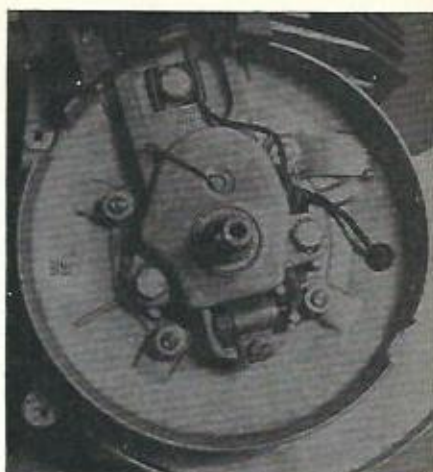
View of model 275, 276, 380, 385, 1680 and 1685 magneto showing timing mark. Punch mark near center of slot for lower left retaining cap screw should be aligned with raised line on backing plate. Models 177, 187, 350, 360, 1660 and 1661 are similar.
